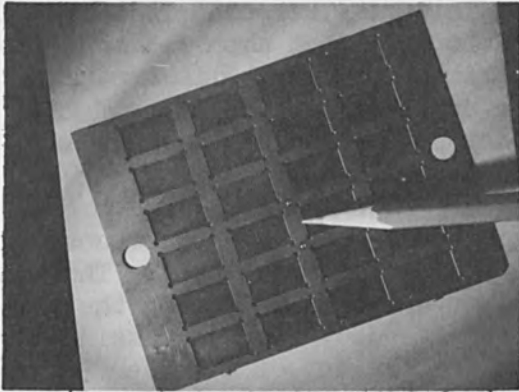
Vacuum-deposition mask, 0.010 to 0.007 in. molybdenum.
